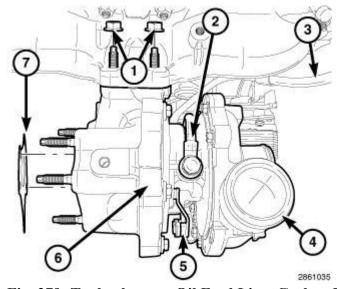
Turbocharger, Oil Feed Line, Gasket, Banjo Fitting & Fasteners Courtesy of CHRYSLER LLC
